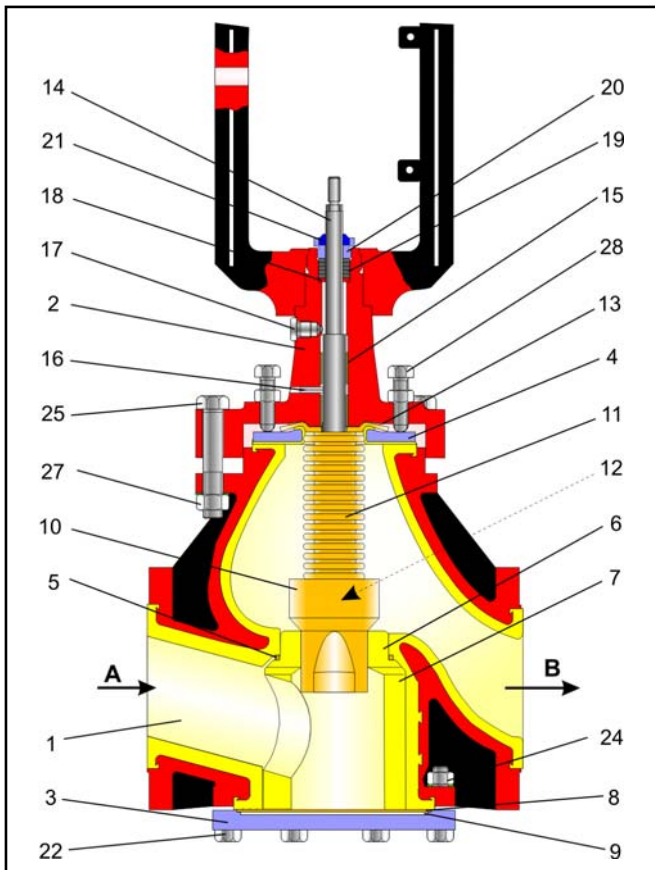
Sectional diagram of Series 1a Globe Valve
